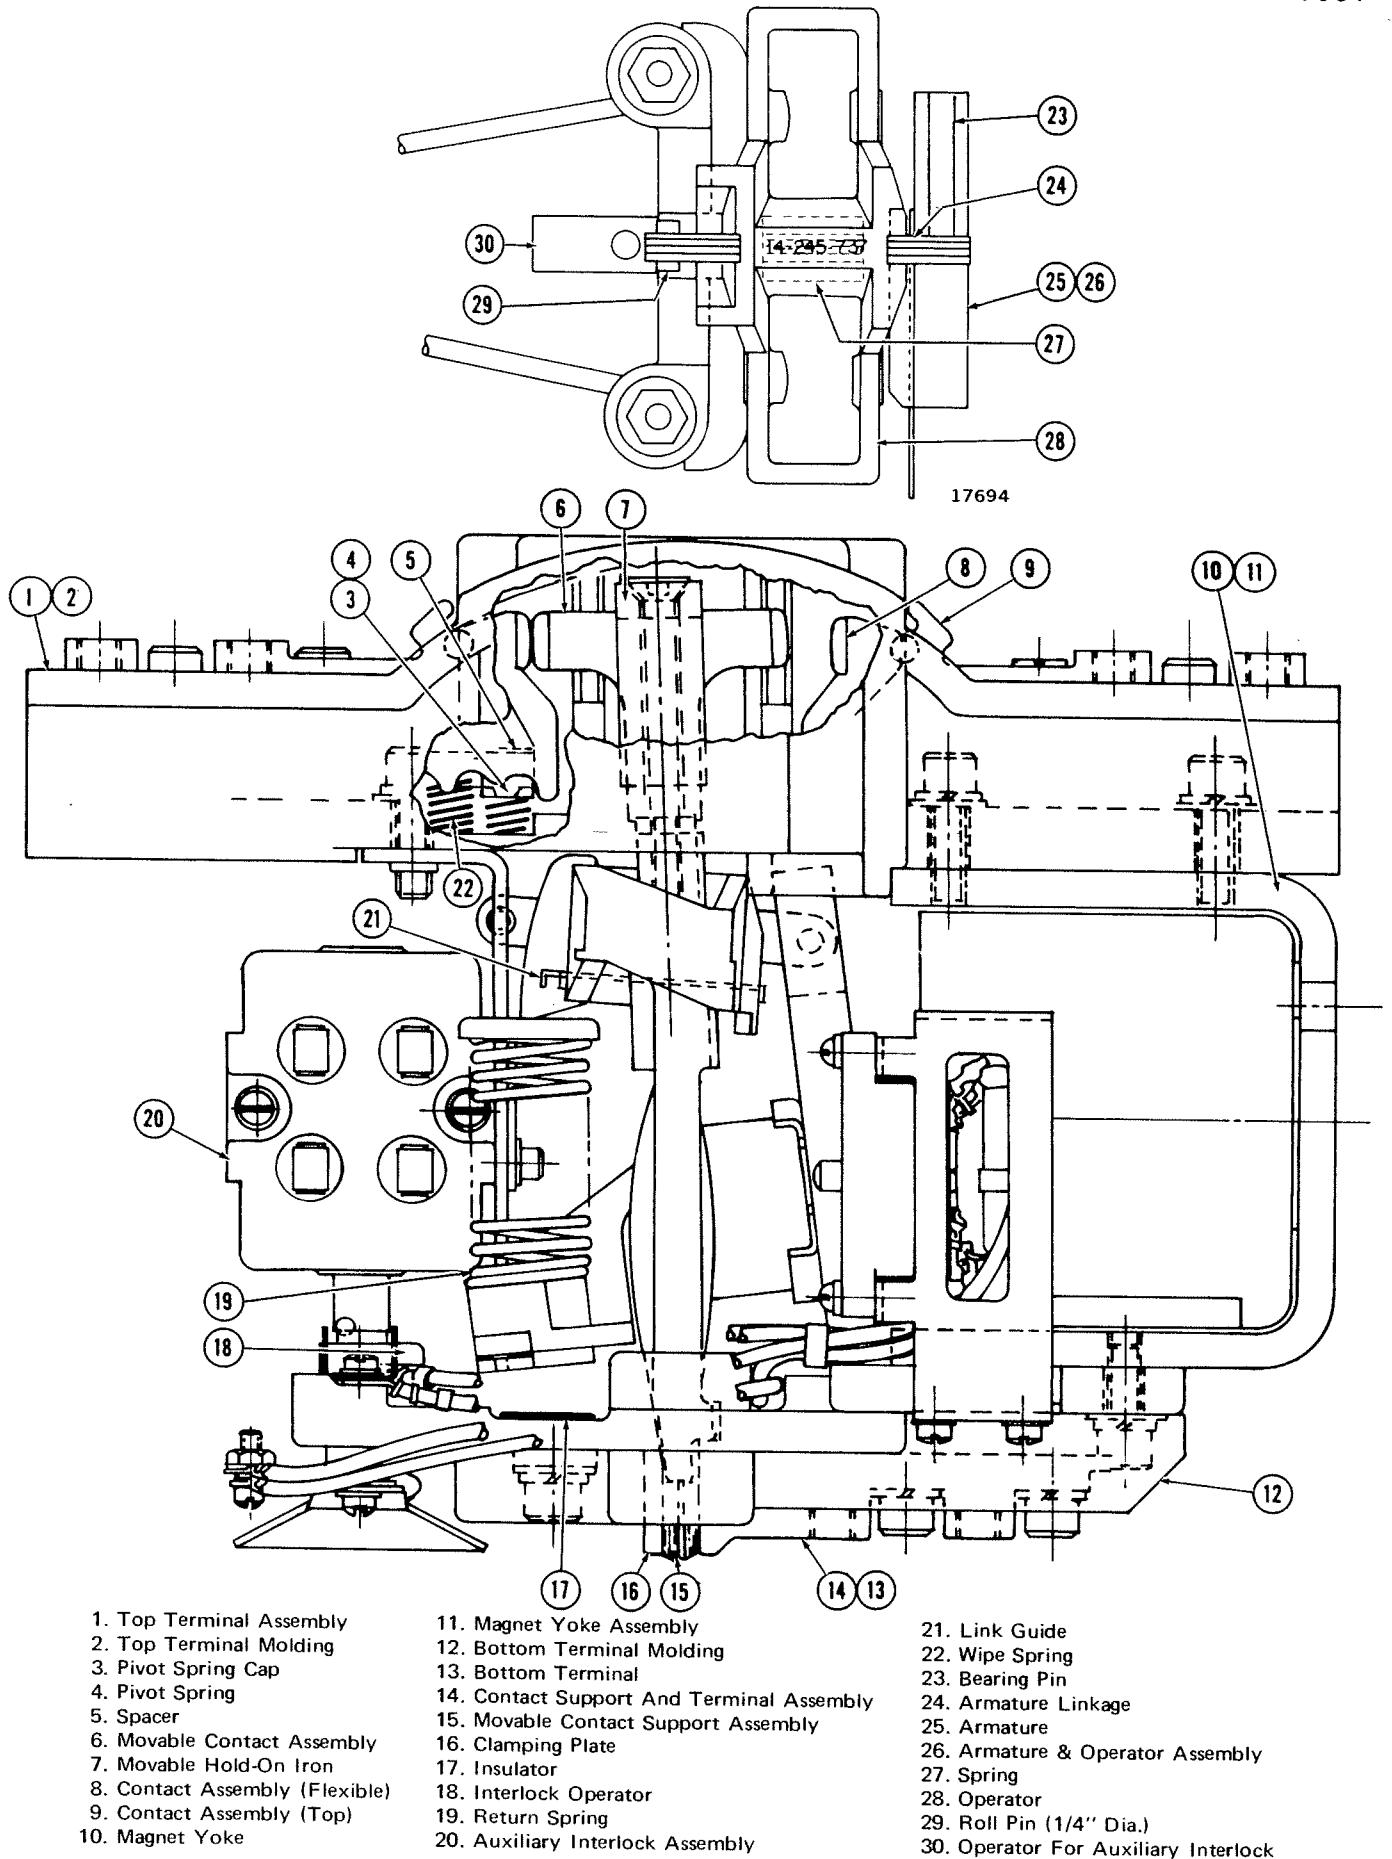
Cut Away View Of Magnetic Switch Assembly
